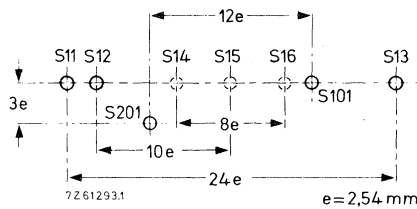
Hole pattern of the printed-wiring board for a single potentiometer (viewed on component side).
